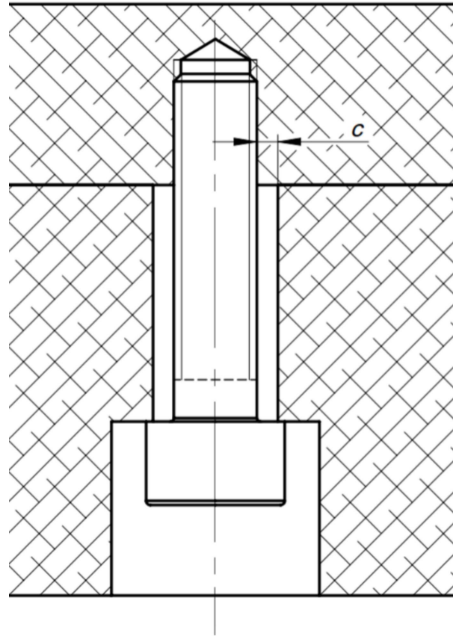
Clearance for the Bolted Connection's True Position Tolerance Calculation
